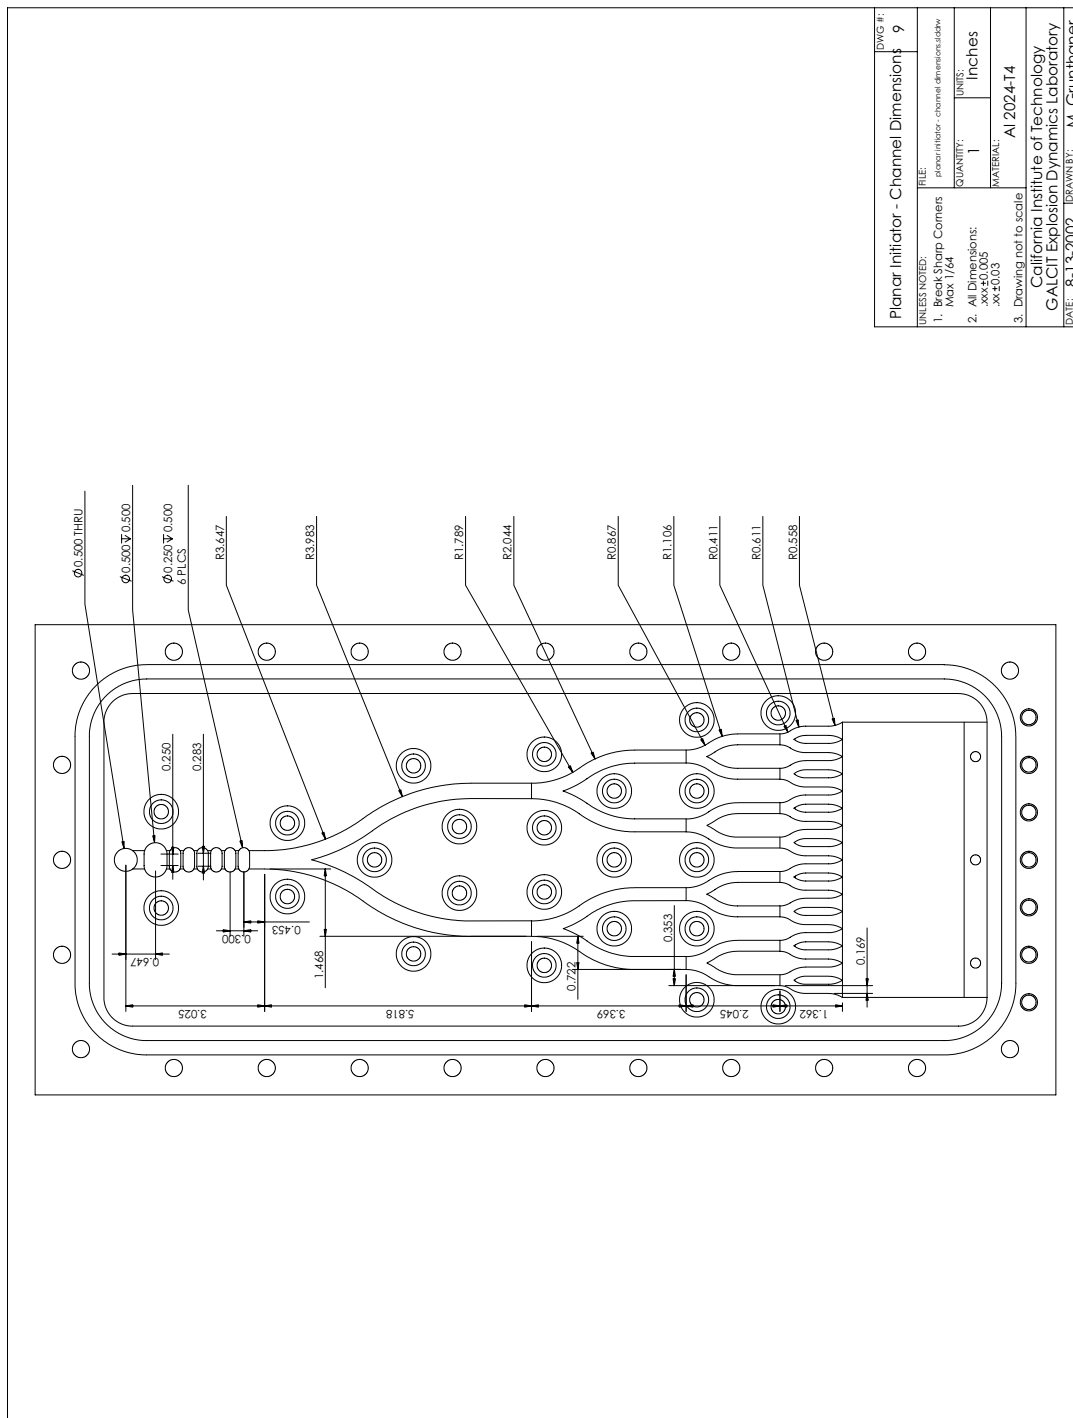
Planar Initiator - Channel Dimensions, Dwg No. 9
